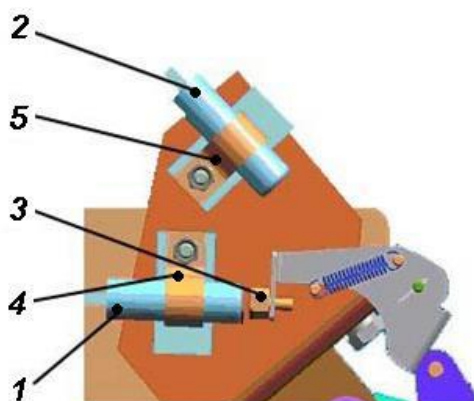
Unloading auger lenix sensors: 1, 2 – sensors; 3 – magnet holder; 4, 5 – clamps
